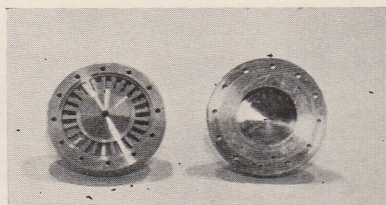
Photograph of rotor illustrated in Fig. 113 with the two parts separated. Upper part, right; lower part, left.
